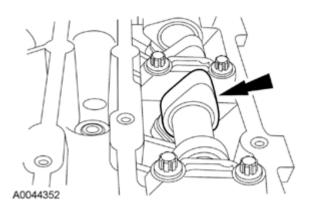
Locating Camshaft Lobe Position Courtesy of FORD MOTOR CO.
